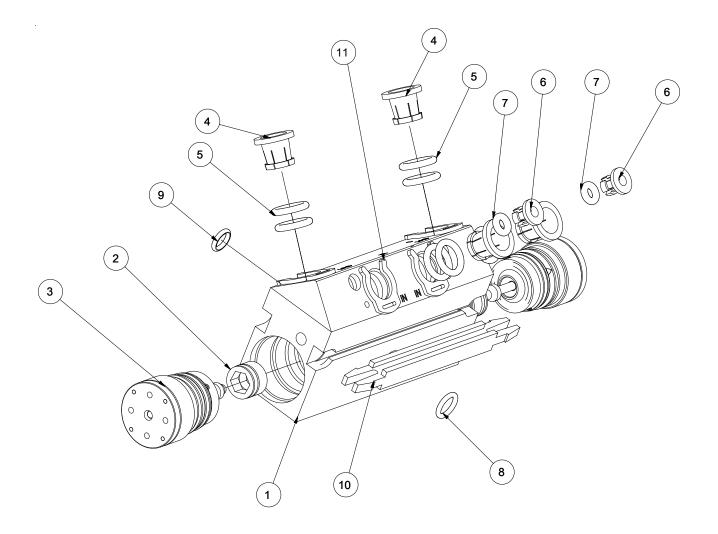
A10727 (Metric) & A10953 (English) 2-Color Valve Circulating Assembly
